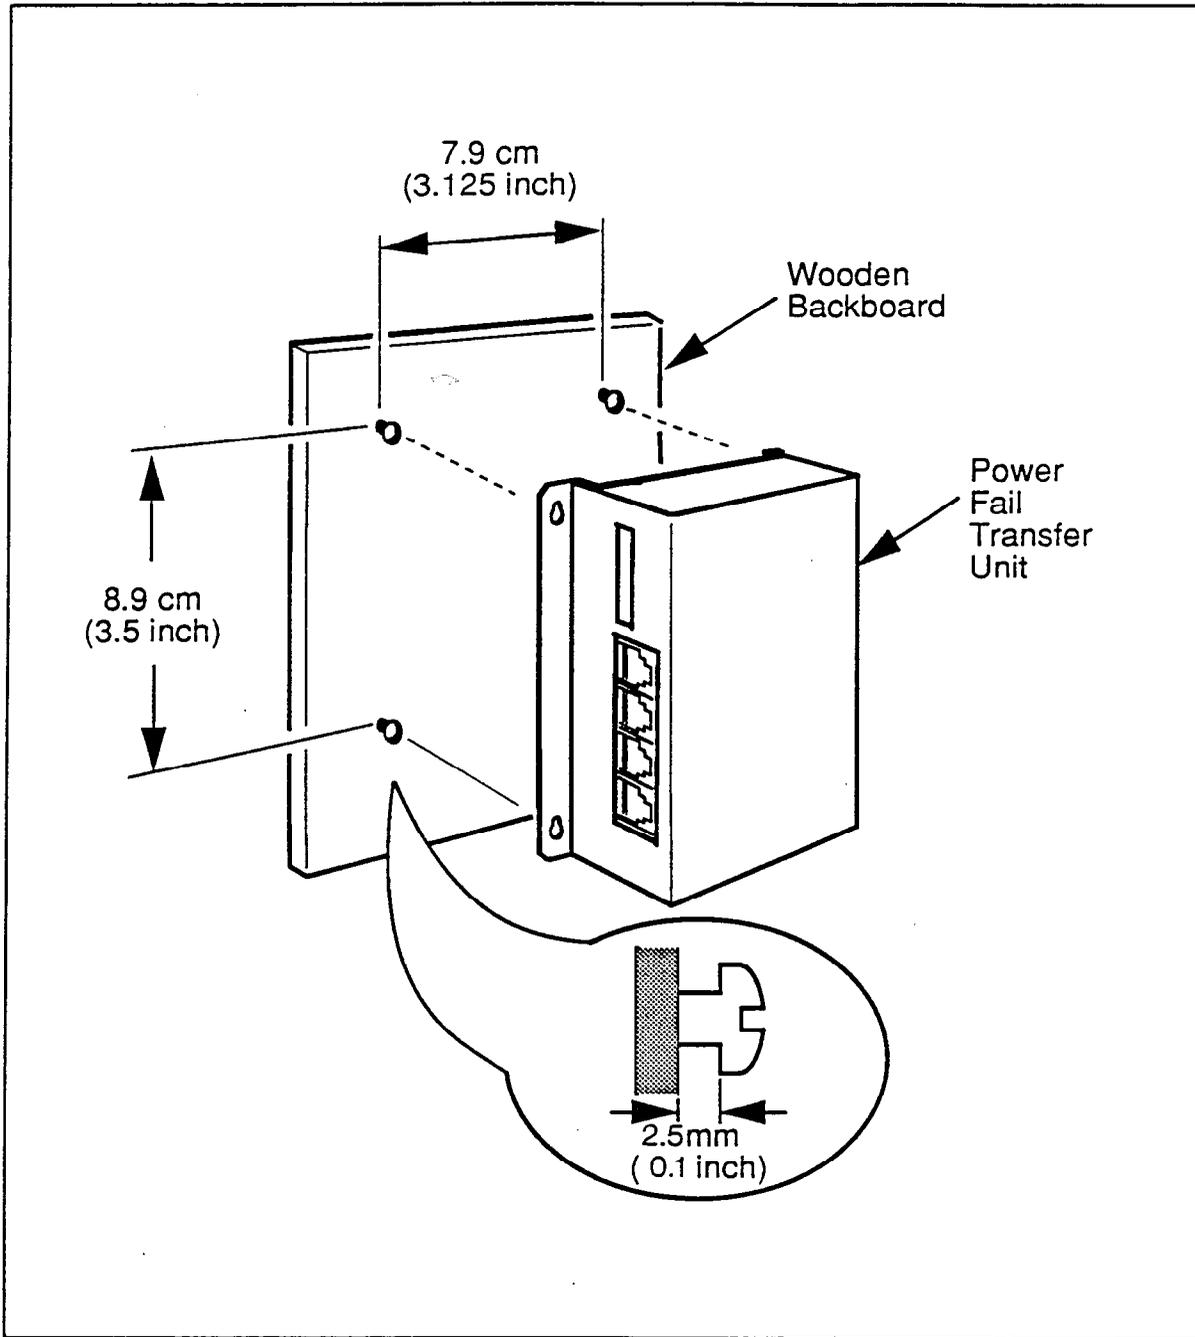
Power Fail Transfer Unit Wall Mounting
